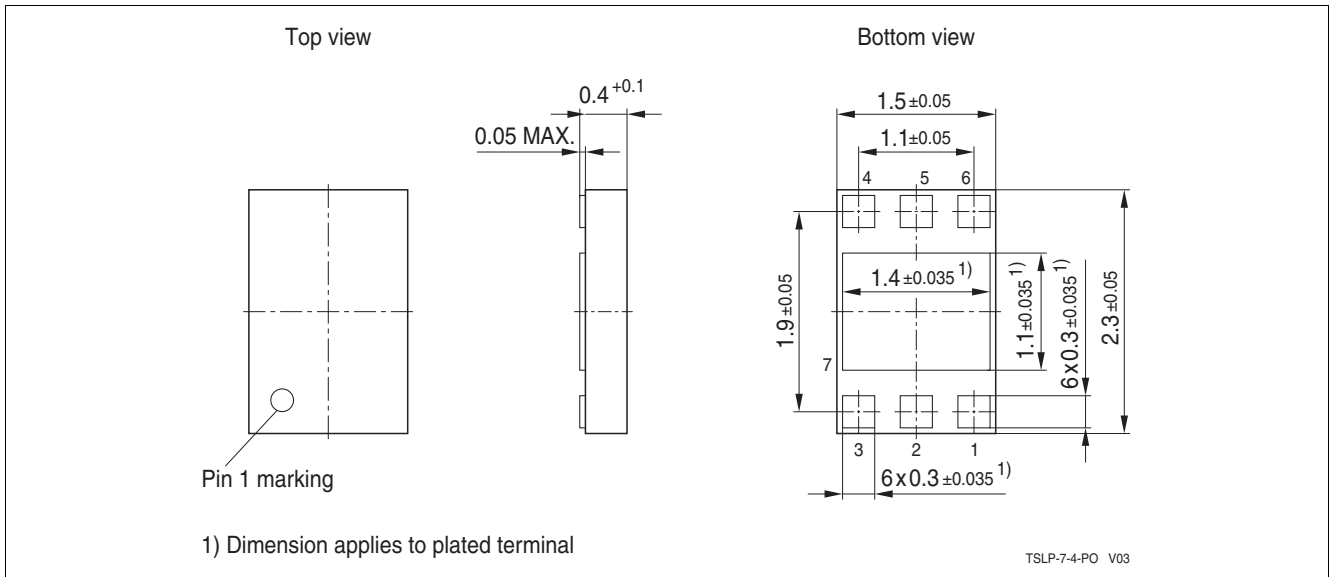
Package Dimensions for TSLP-7-4 (top, side and bottom view)
